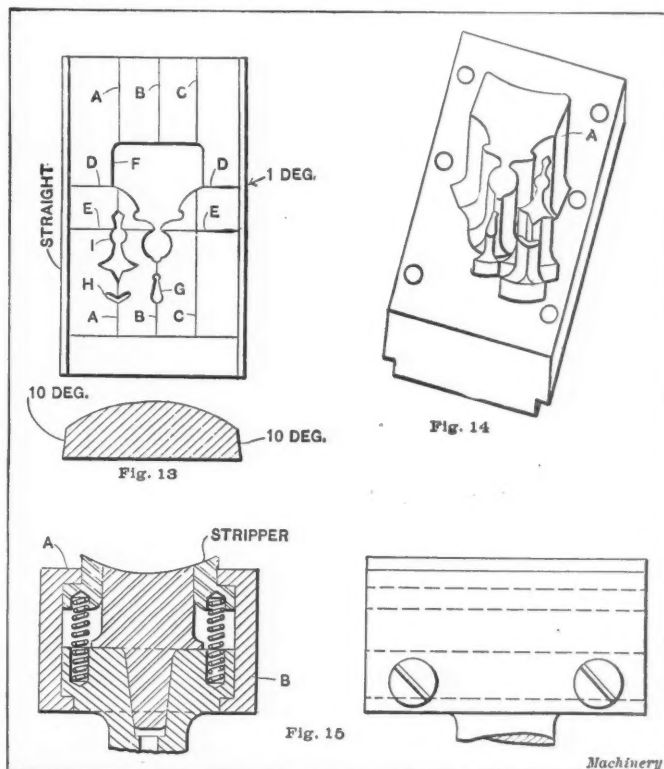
Laying out a Perforating Die. Fig. 14. Perspective View of Perforating Punch. Fig. 15. Punch Holder and Stripper, showing Punch, Fig. 14, in Section
